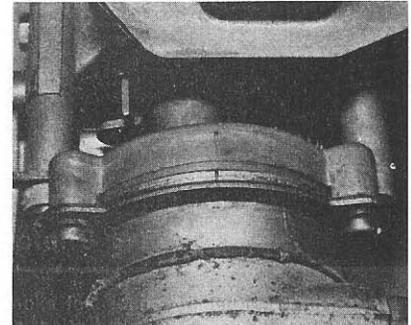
Alignment marking tool for new automatic choke bodies (40 DFA and 40 DFAV types) (Sec 8)
